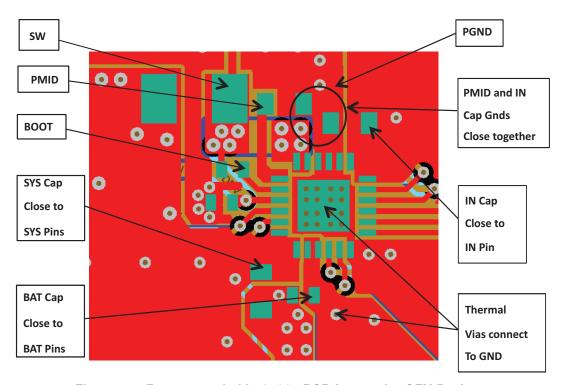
Recommended bg2426x PCB Layout for QFN Package
